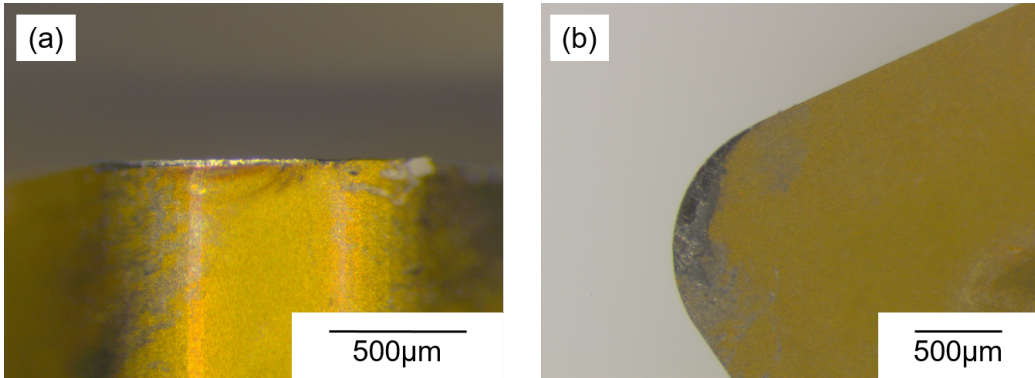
Example tool wear produced during face turning of face 1 on billet 3_2. The tool shown was used during the 1st repeat of face 1. The tool shown is representative of all passes performed on face 1.
